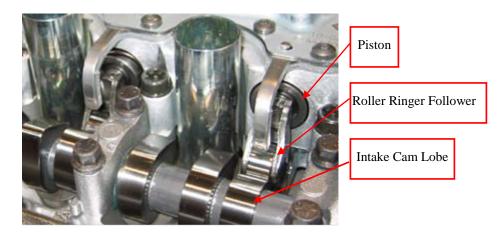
SOHC, RFF, and Hydraulic Piston
